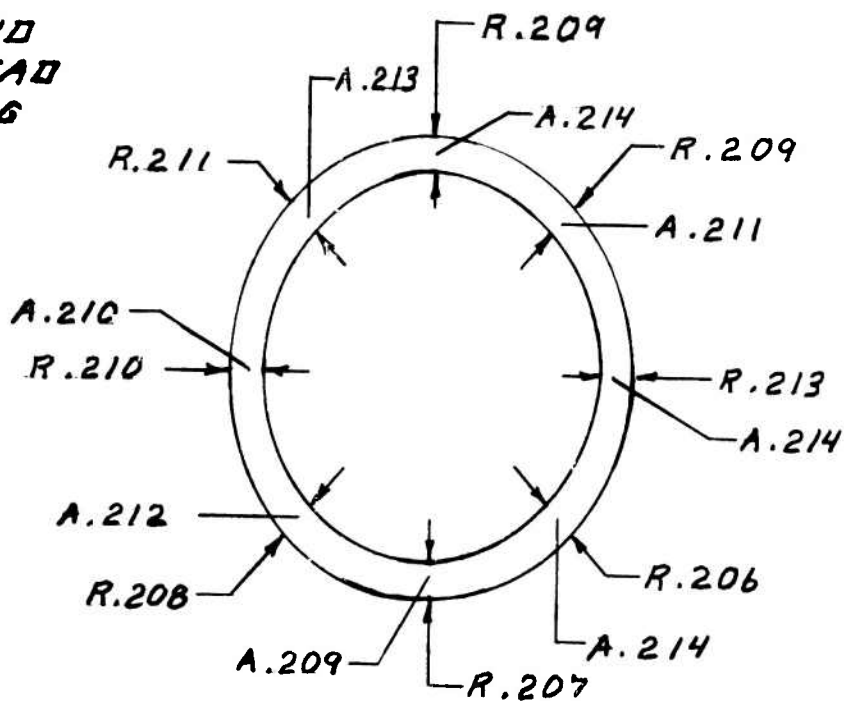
O-RING FROM OUTBOARD END - W DIMENSION AT VARIOUS POINTS
